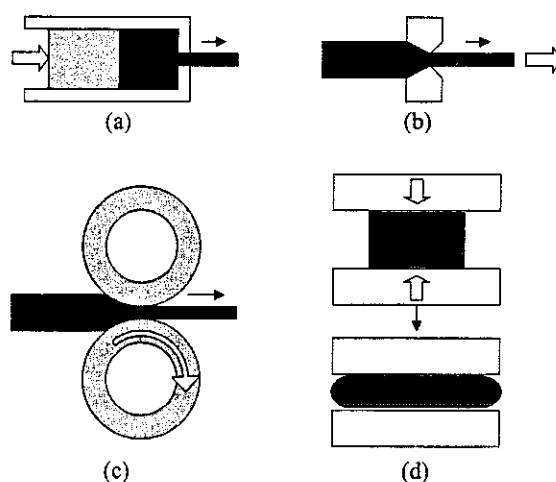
Some common mechanical deformation techniques: (a) extrusion, (b) drawing, (c) rolling, and (d) forging.
